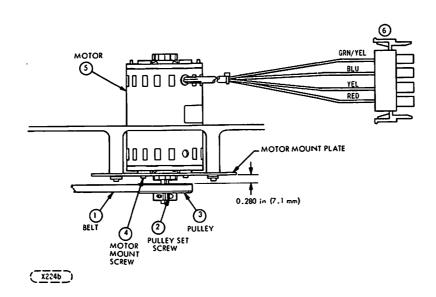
DRIVE MOTOR ASSEMBLY
